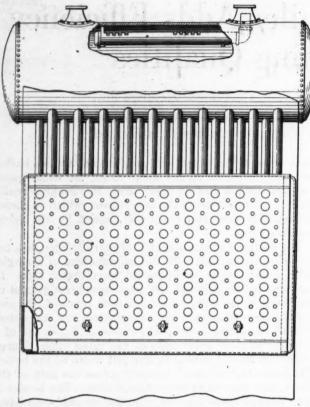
ELEVATION OF ONE DRUM, THE TUBES AND WATER LEG
